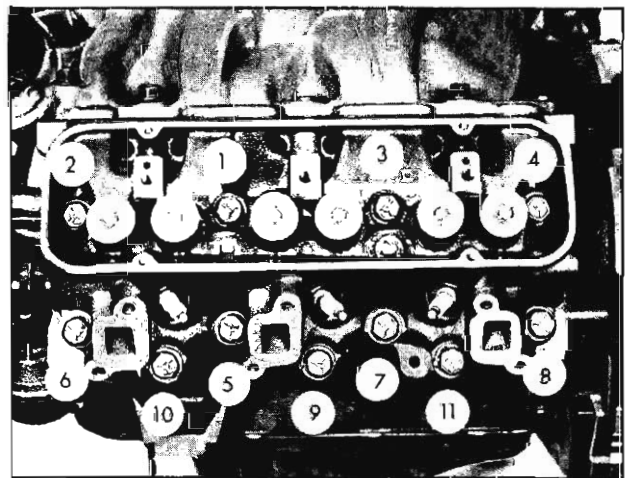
Cylinder Head Bolt Tightening Sequence
